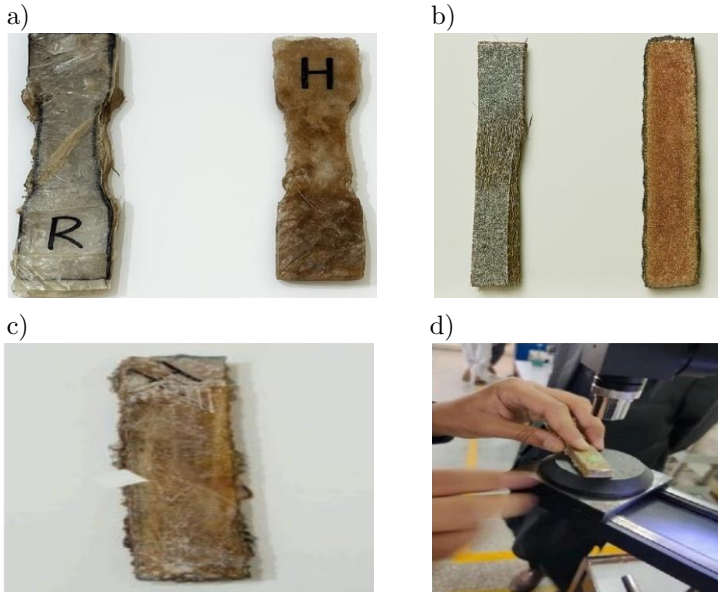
Mechanical test specimens: a) tensile specimen, b) flexural specimen, c) impact specimen, d) hardness evaluation specimen.
